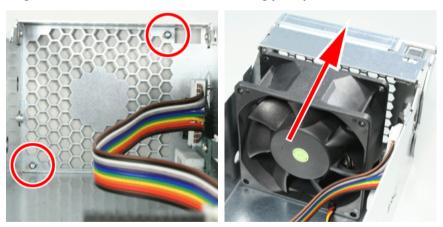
Positioning the blower onto the mounting pins, pointed outward
